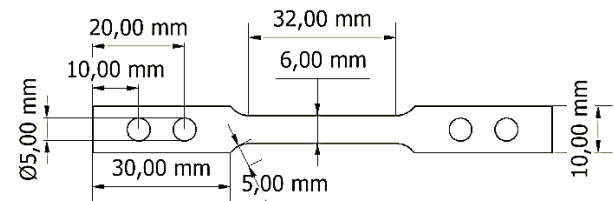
Dimensions of aluminum quasi-static tensile test specimen
